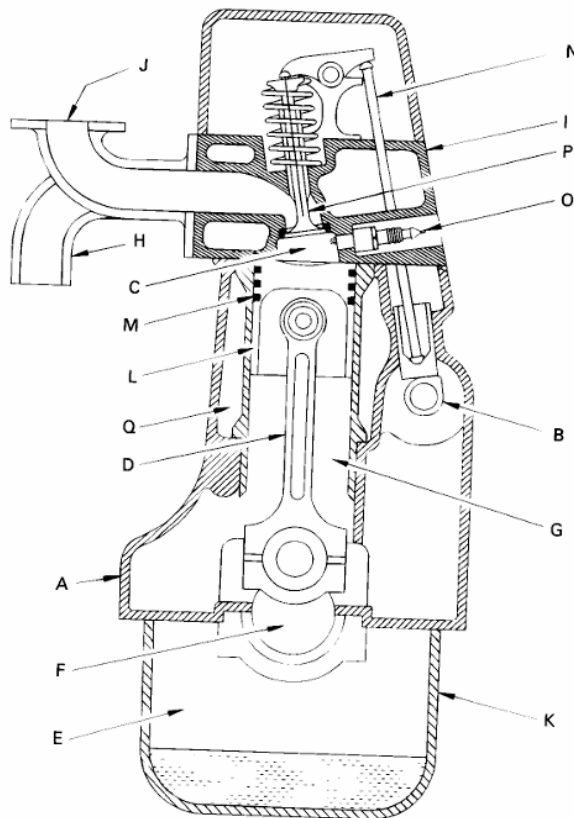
Cross-section of four-stroke cycle S1 engine showing engine components: (A) block, (B) camshaft, (C) combustion chamber, (D) connecting rod, (E) crankcase, (F) crankshaft, (G) cylinder, (H) exhaust manifold, (I) head, (J) intake manifold, (K) oil pan, (L) piston, (M) piston rings, (N) push rod, (O) spark plug, (P) valve, (Q) water jacket.
